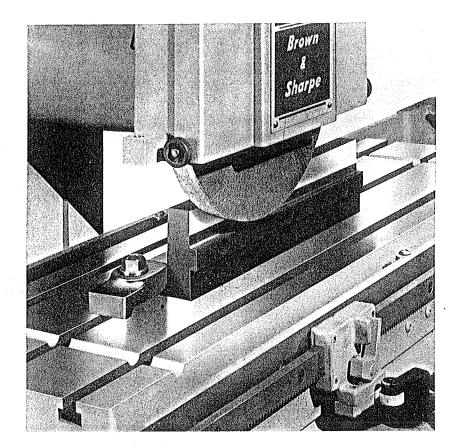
A sidewheel grinding setup. The mounting of the table in generous V and flat ways on the fixed bed permits such jobs to be done with exceptional accuracy.
